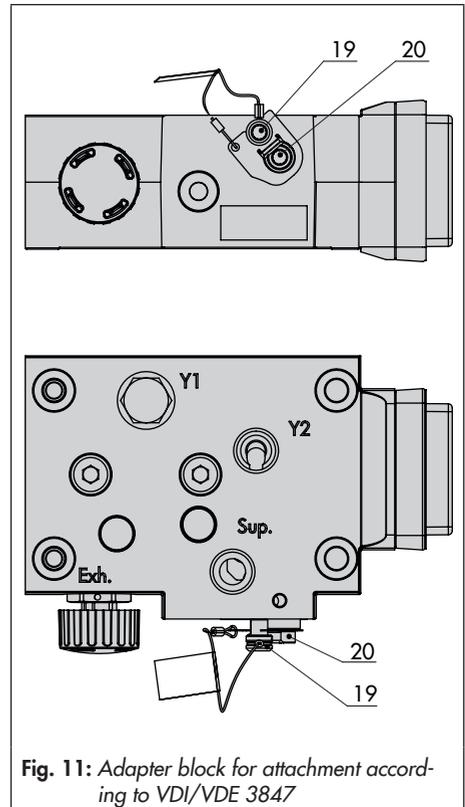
Adapter block for attachment according to VDI/VDE 3847
